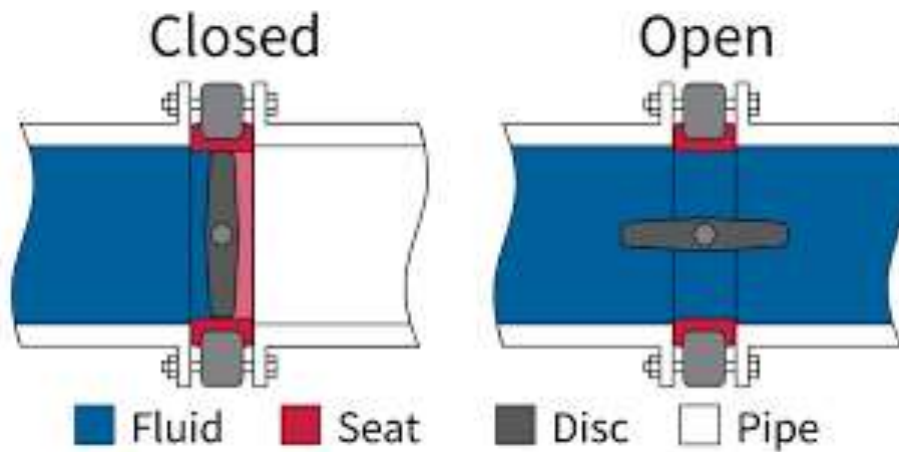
SHOWING A BUTTERFLY VALVE IN THE CLOSED POSITION AND THE OPEN POSITION.
